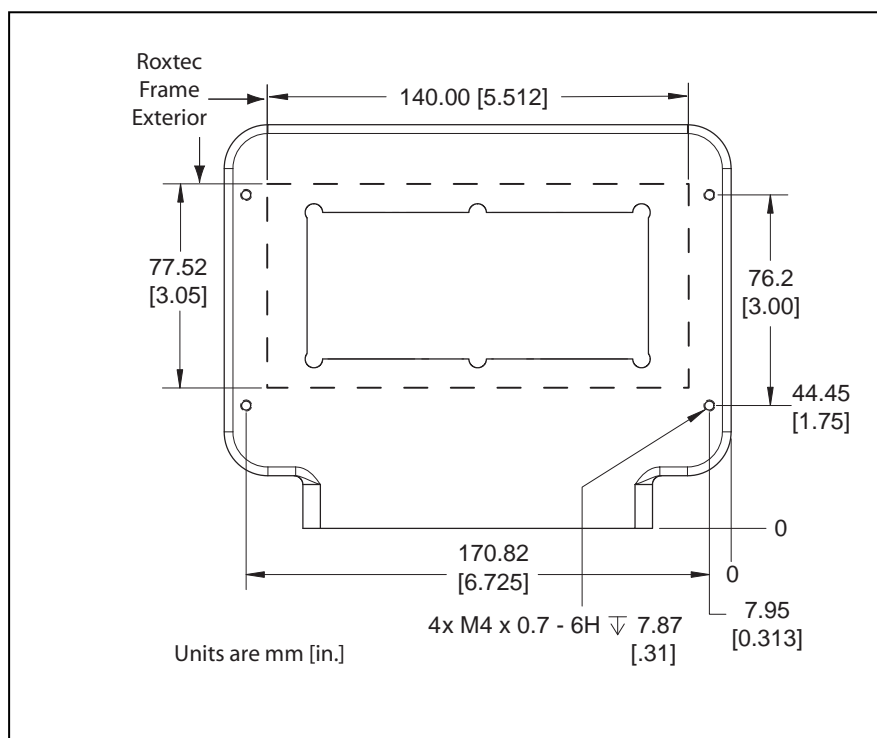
Dimensions of Cable Tray Attachment to Cable Inlet Box
